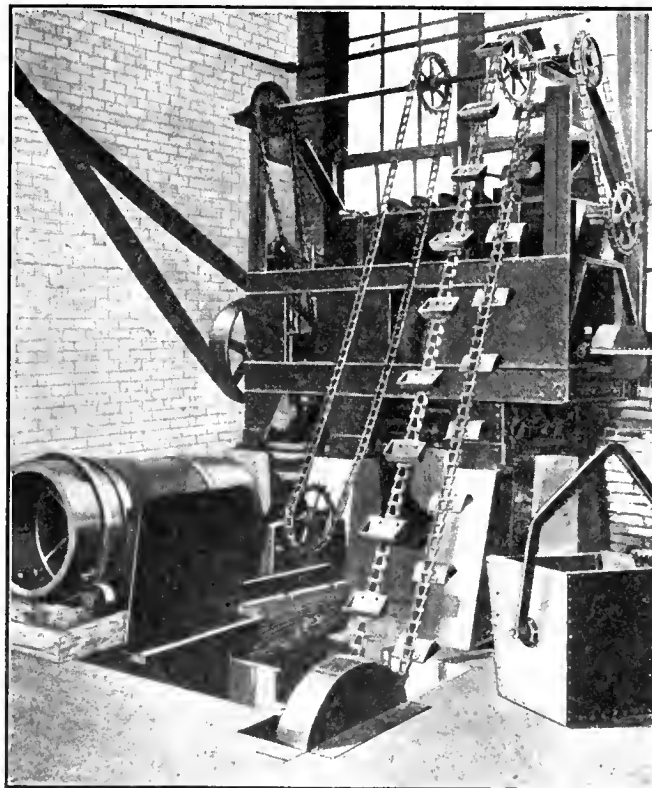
MIXING, ROLLING AND BONDING MACHINE.
